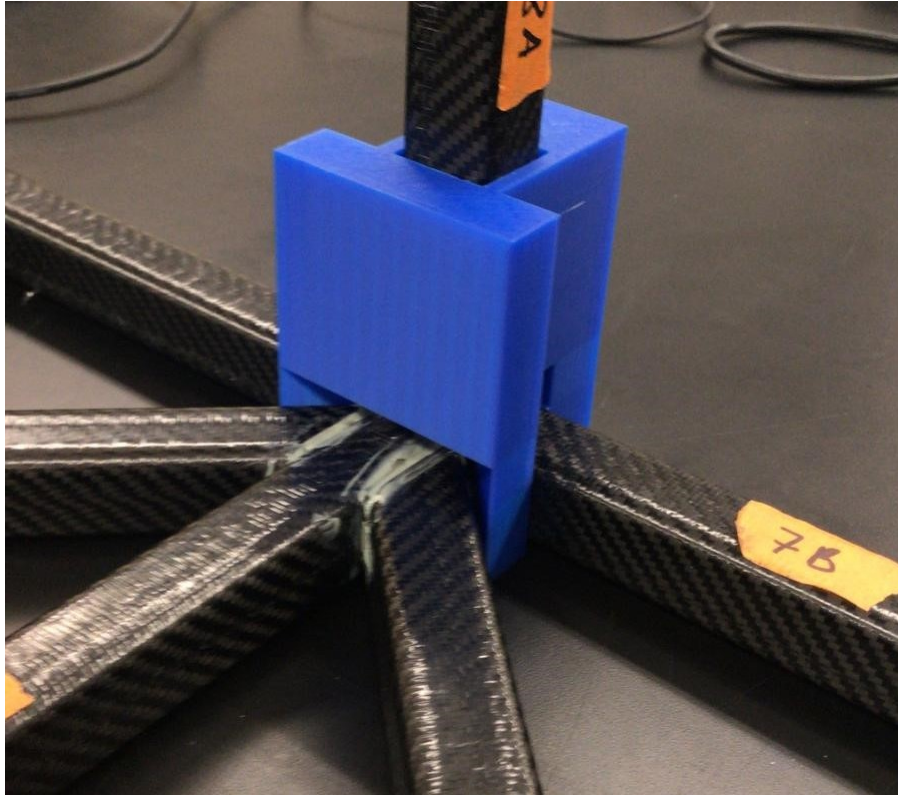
3D Printed Part for Assembling Carbon Fiber Frame
